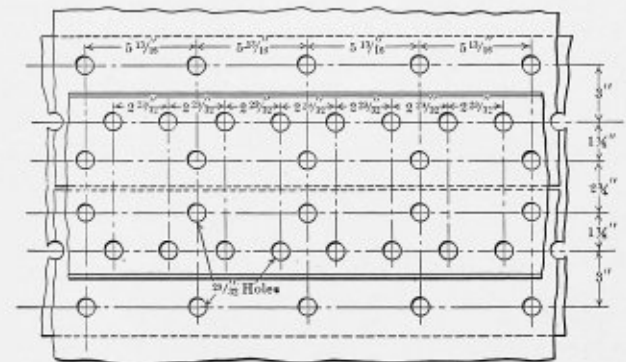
Triple Riveted Joint with Wide Rivet Spacing in Inner Rows
